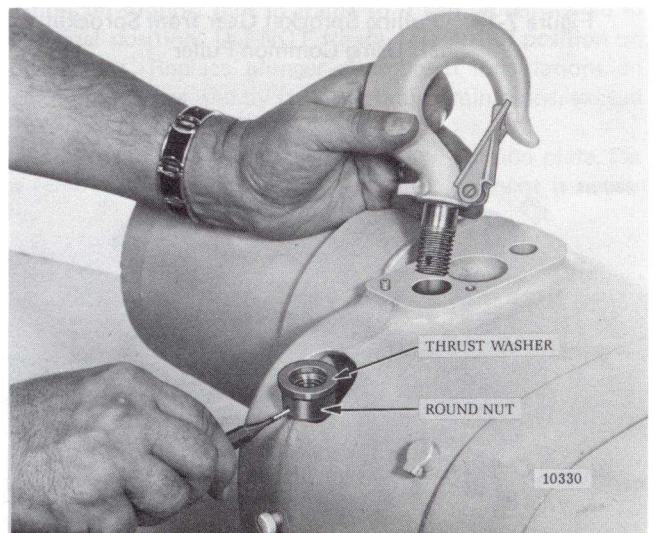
Removing Upper Hook and Hook Nut From Hoist Frame (1/4 thru 1 ton models)
